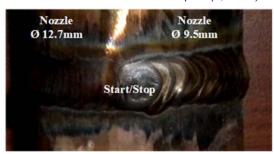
Sample no. 3 weld bead geometry Note: Left weld cap is welded with nozzle diameter 12.7mm and right cap is weld with 9.5mm
